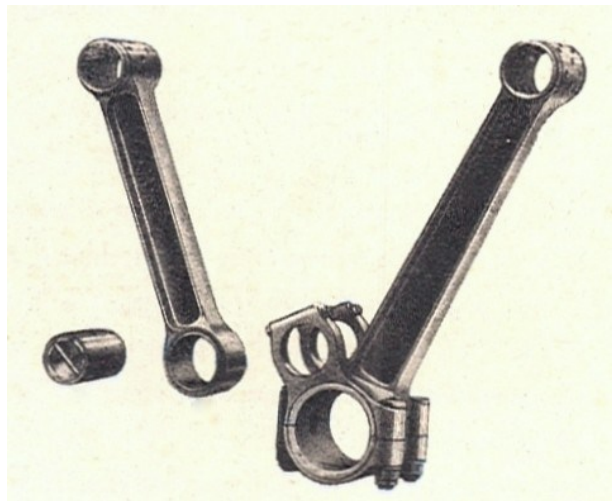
Sketch of ordinary master rod and connecting rod in V-type mechanism [84]
